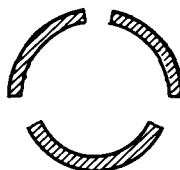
Top view of some typical cylindrical rotary oscillator rods.
